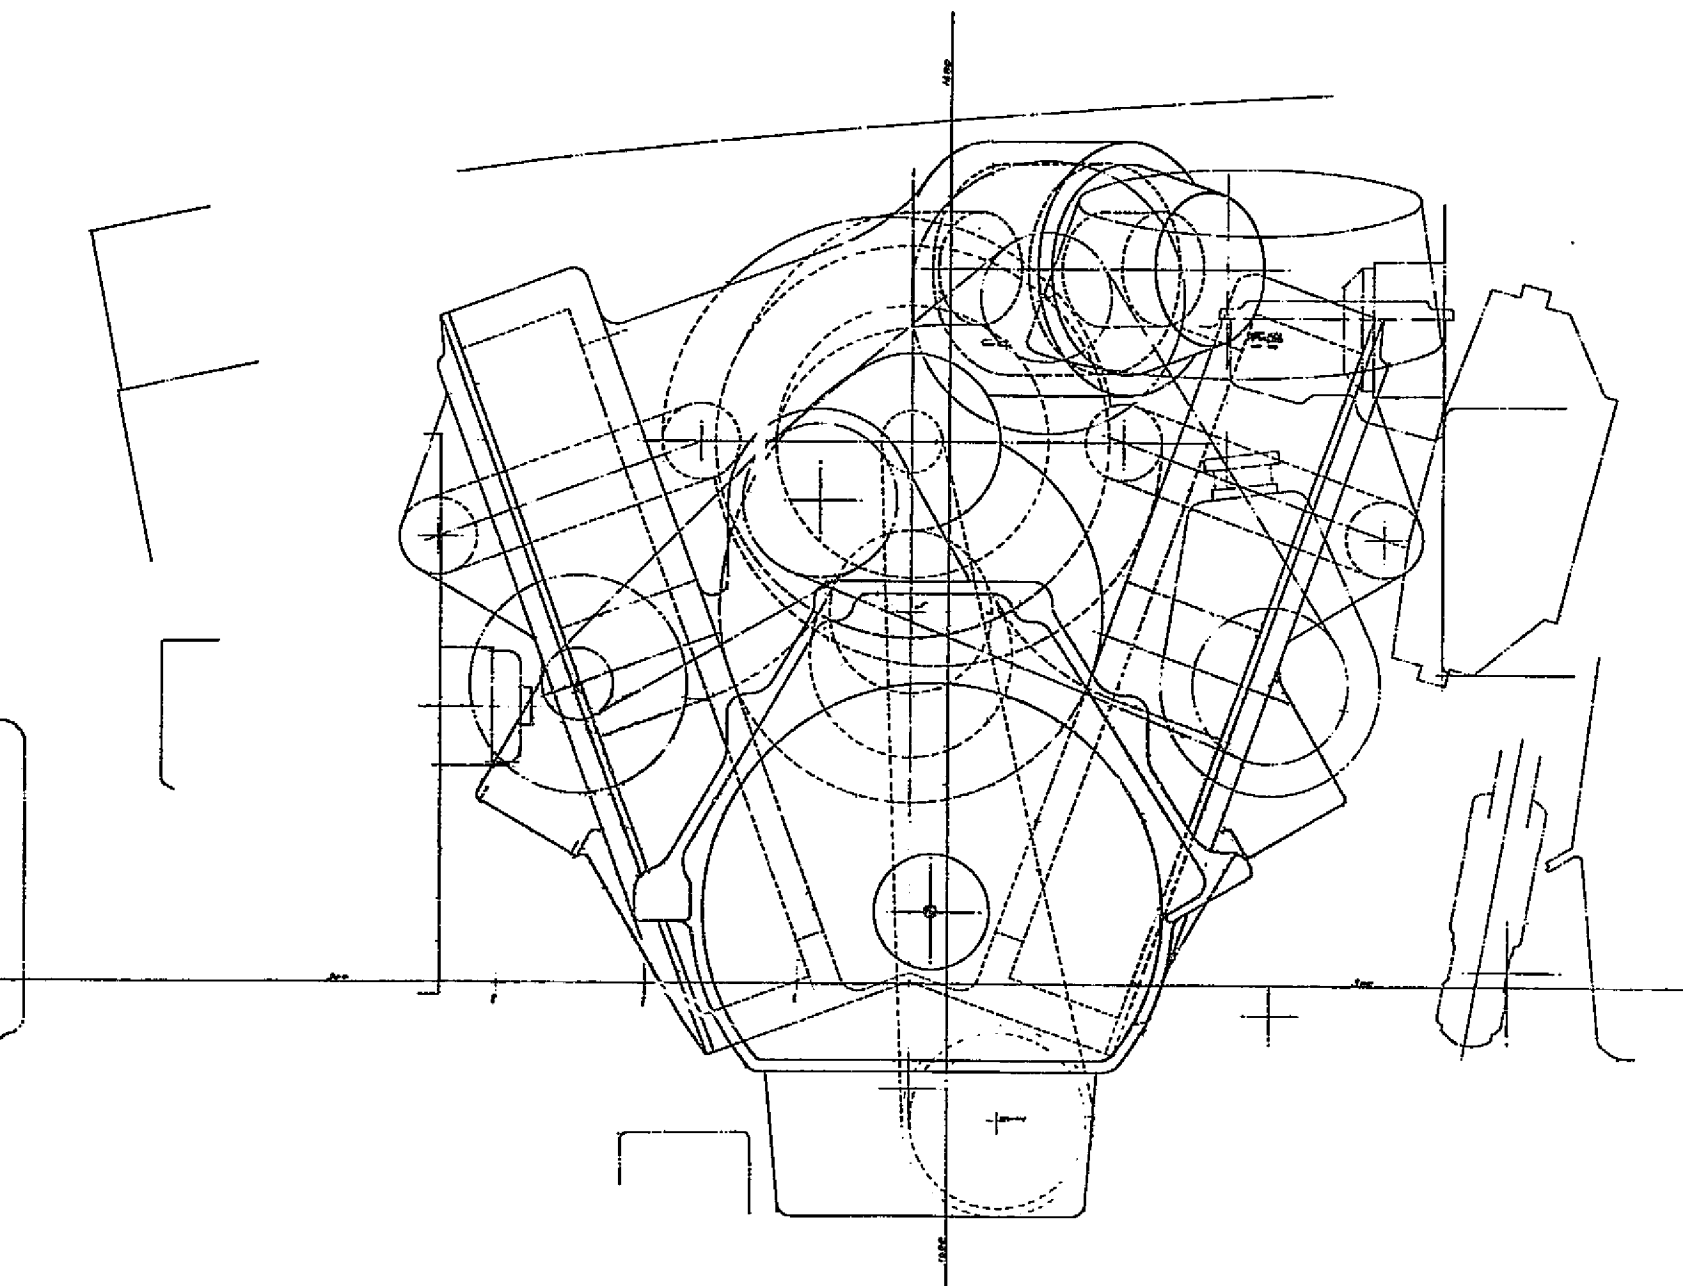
General arrangement—two-shaft engine, one regenerator, can combustor, radial-inflow gasifier turbine, axial-flow power turbine.
